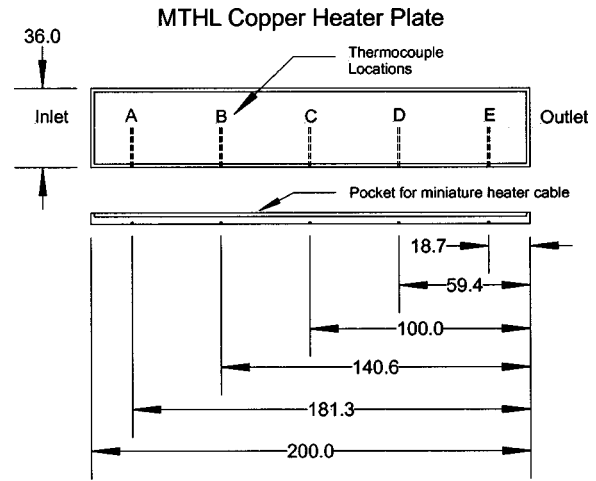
Schematic of heater block showing thermocouple locations (dimensions in mm)
